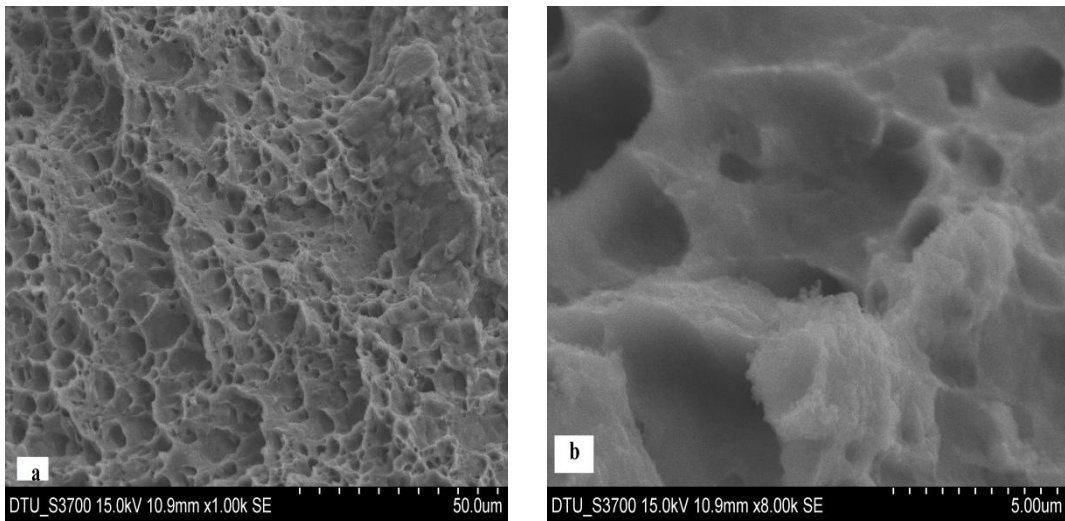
(a & b) Base material specimen tensile fractography (lower & higher magnification)
